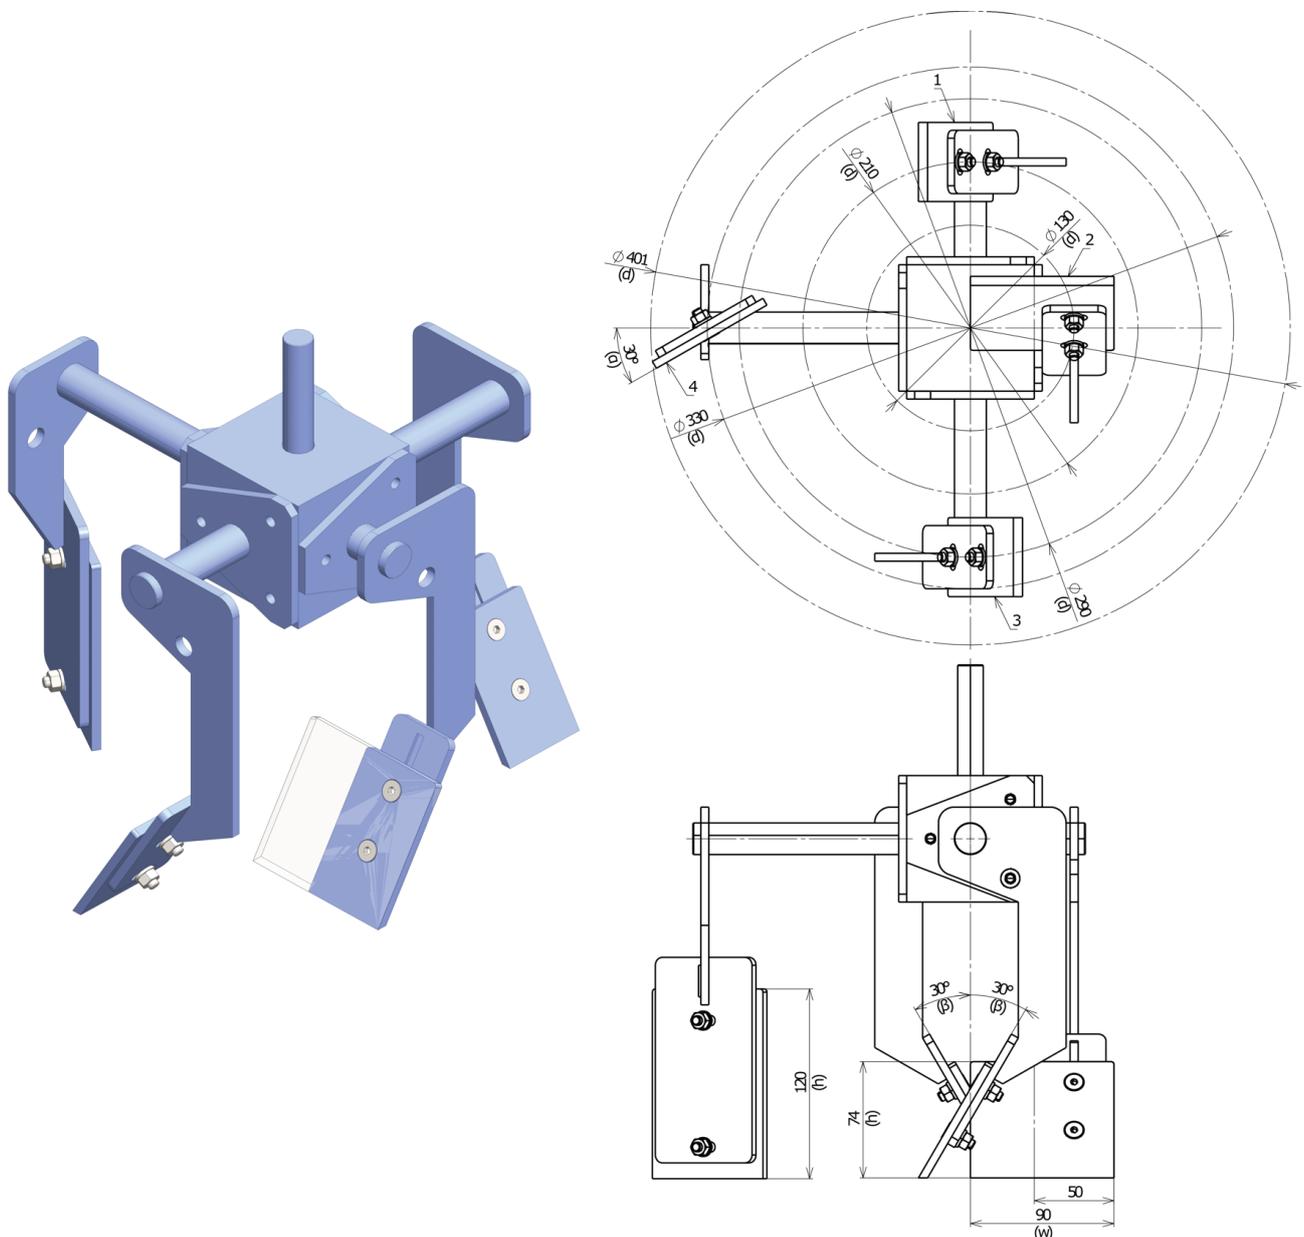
Isometric view of the paddle mixer assembly and sketch with the main dimensions
